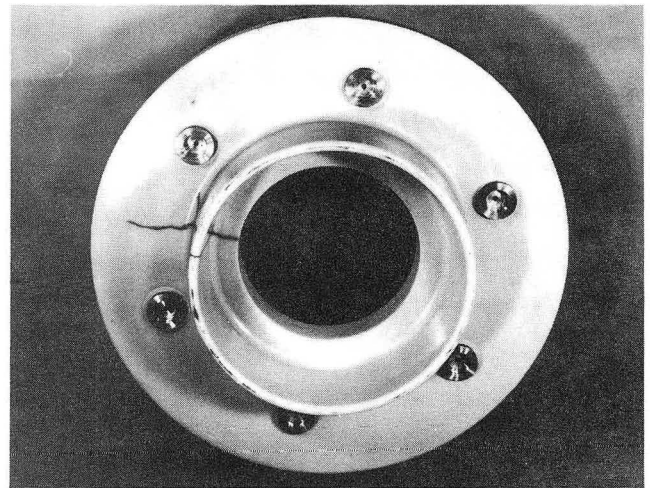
Air Side of Prototype Insulator After Destruct Test CBB 855-3608
